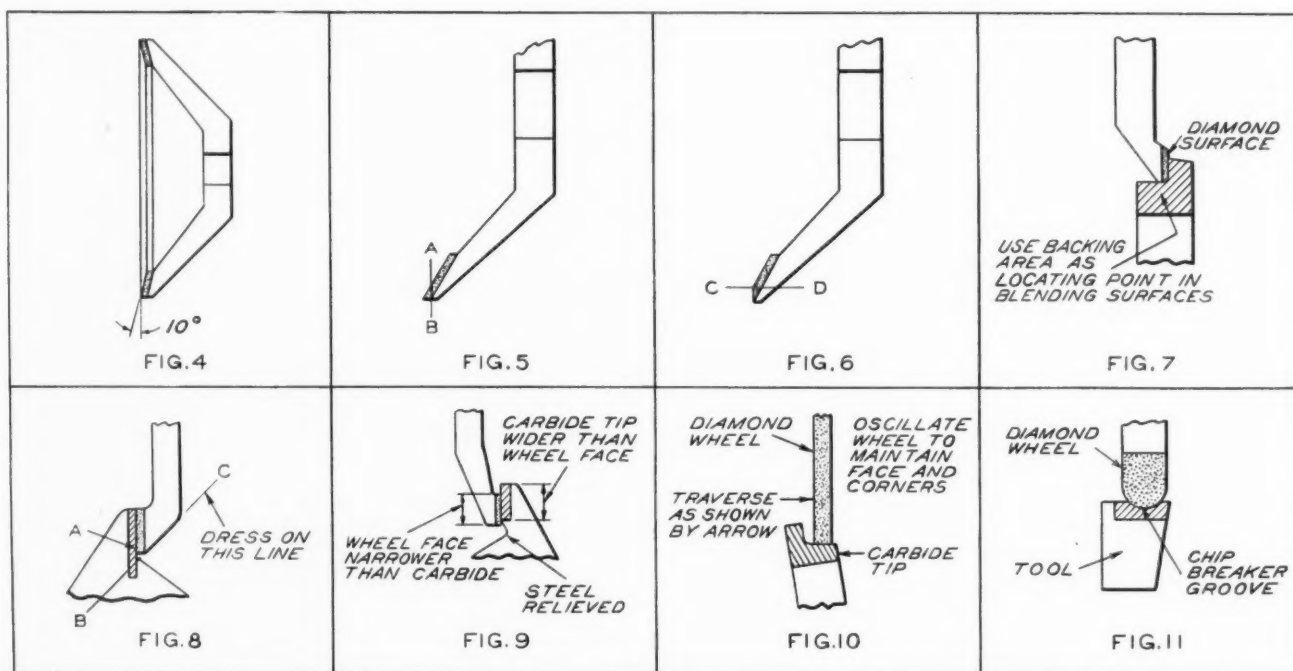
Concave-face Diamond Wheel Designed for Corner Grinding. Fig. 5. Wheel is Used Until Backing Material Interferes with Cut, as Shown by Line AB. Fig. 6. Wheel is then Dressed on Periphery to Line CD until Diamond Coating Shape is Restored. Fig. 7. Using Diamond Wheel in Grinding a Simple Formed Surface. Fig. 8. If Diamond Surface Wears
